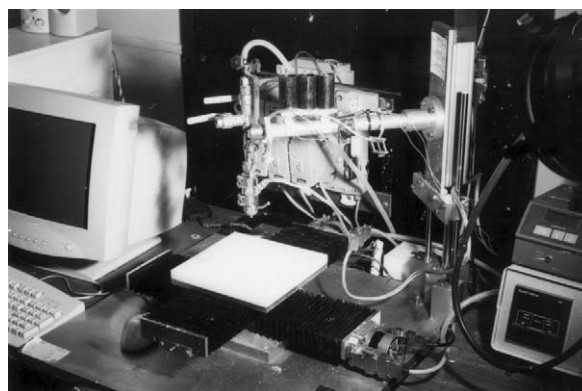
The extrusion freeforming apparatus with three axis table and extruder mounted on the z axis.
